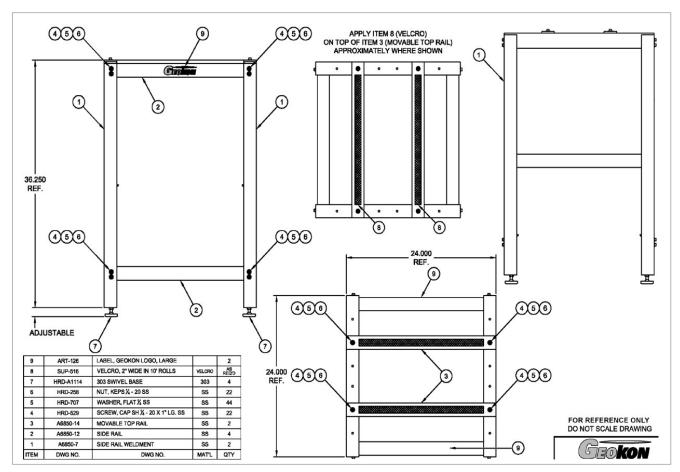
Direct Pendulum Measurement Table Assembly Drawing
